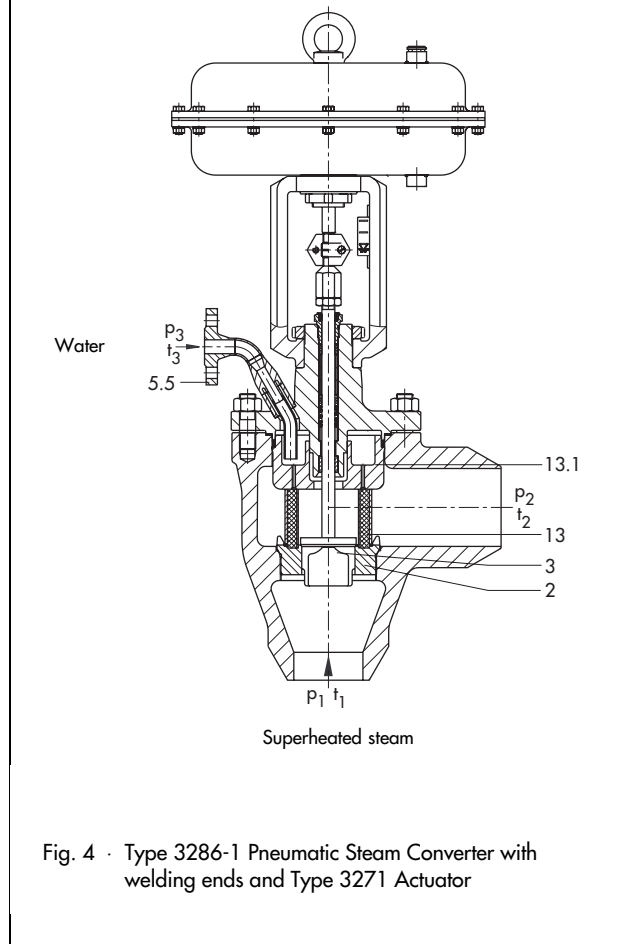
· Type 3286-1 Pneumatic Steam Converter with welding ends and Type 3271 Actuator
